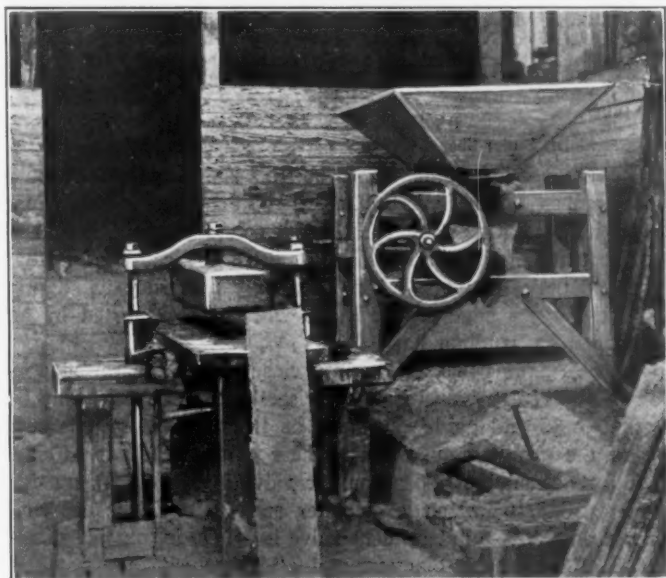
Grinding and Picking Machine, Air Press and a Completed Sheet of Lagging
